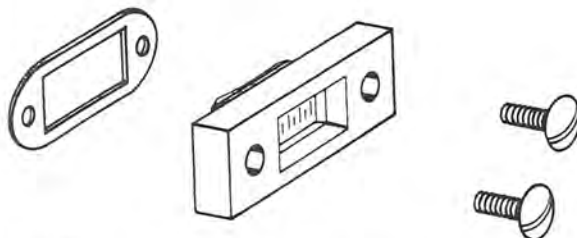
Holding Fixture\* For AiResearch Turbocharger
